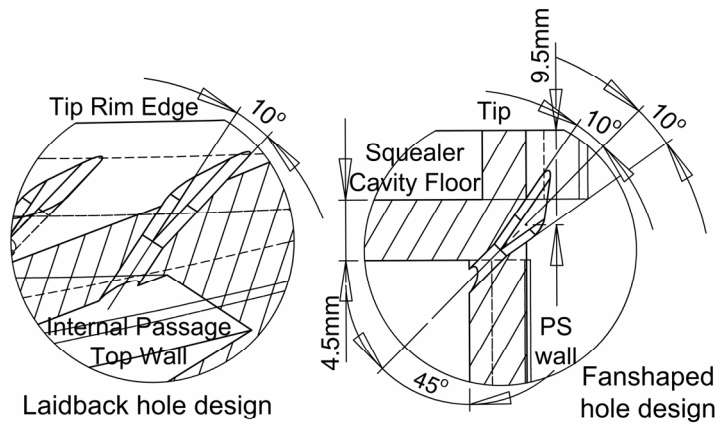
Detail geometry of a PS shaped hole for blade 2
